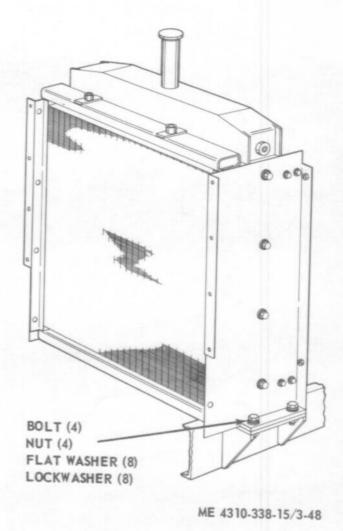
Radiator and oil cooler assembly; removal and installation.
